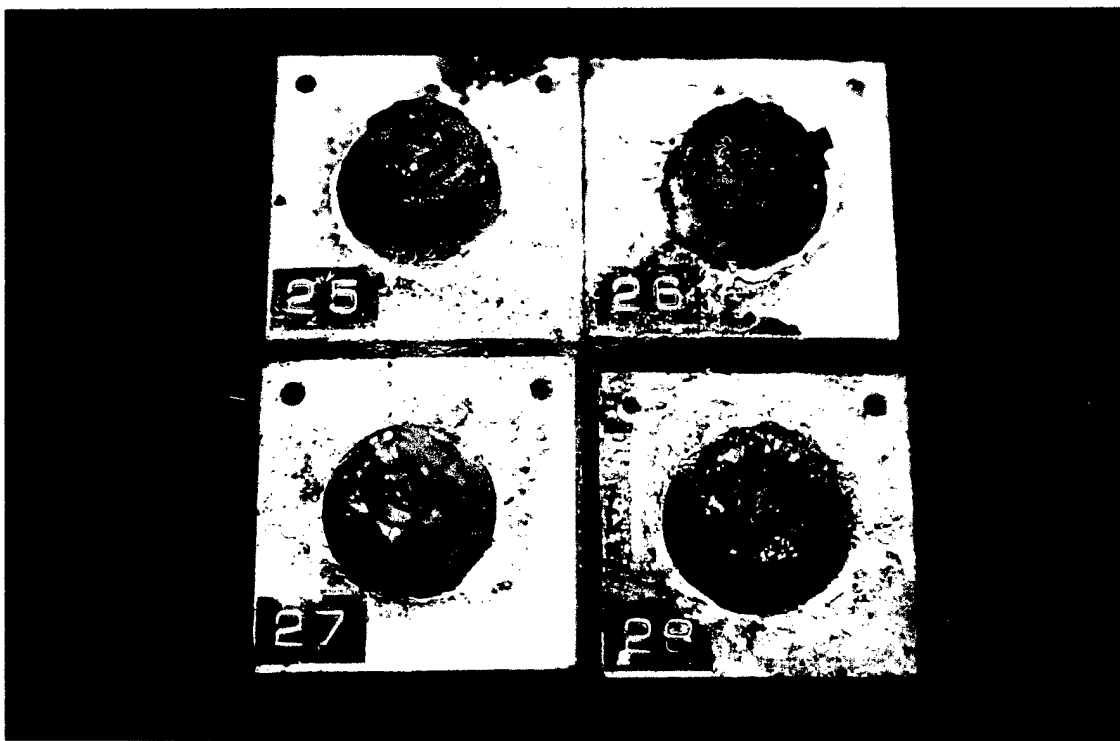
H11 Chromium Hot Work Tool Steel Nuts With Antiseize Solid Film Lubricant (MoS_2) 62 Days of Salt Spray. Reduced 25%.
